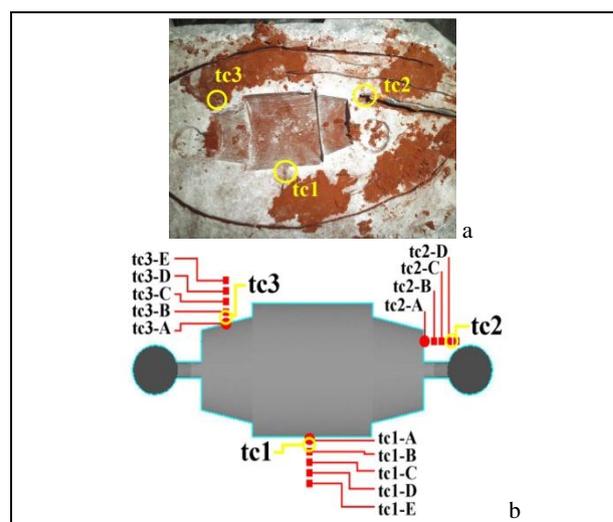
(a) Mould drag section and (b) thermocouple locations.
